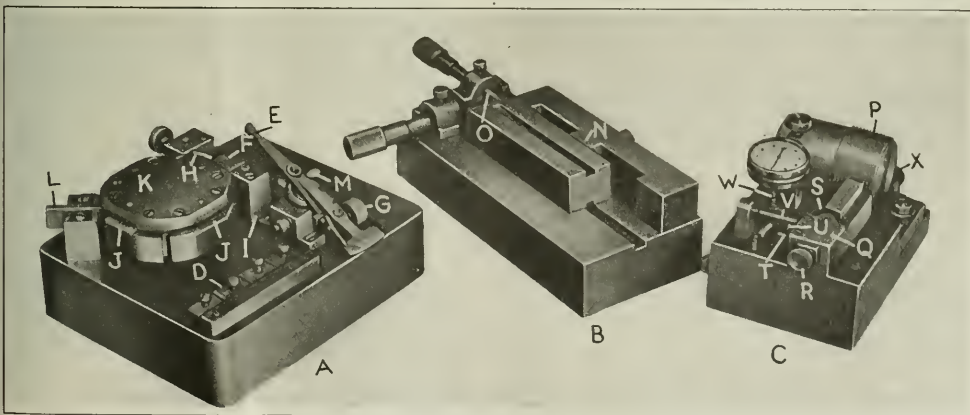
Group of Master Gages used in inspecting the Various Types of Pipe Thread Chasers
